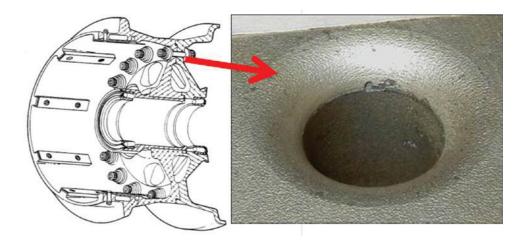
A schematic of the Main Landing Gear wheel designs and a close up of corrosion pitting observed adjacent to a bolt hole on the inner surface.
